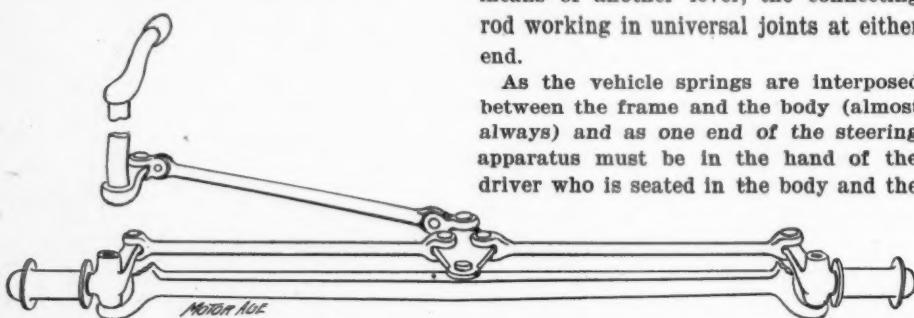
ONE FORM OF CORRECT STEERING GEAR.
